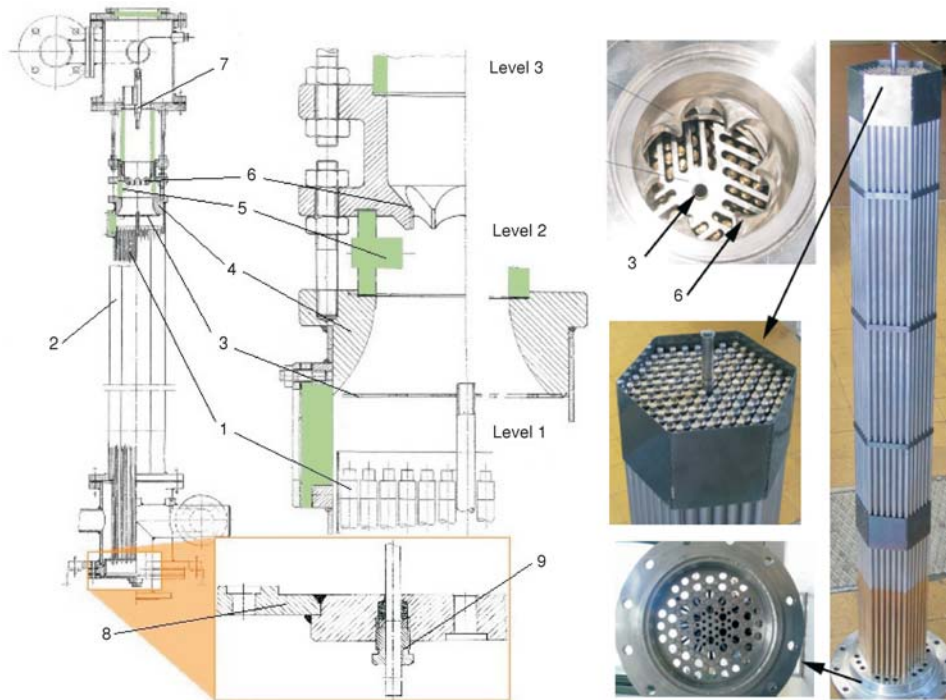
Construction drawing of the fuel bundle model, photograph of the core exit channel and fuel assembly
